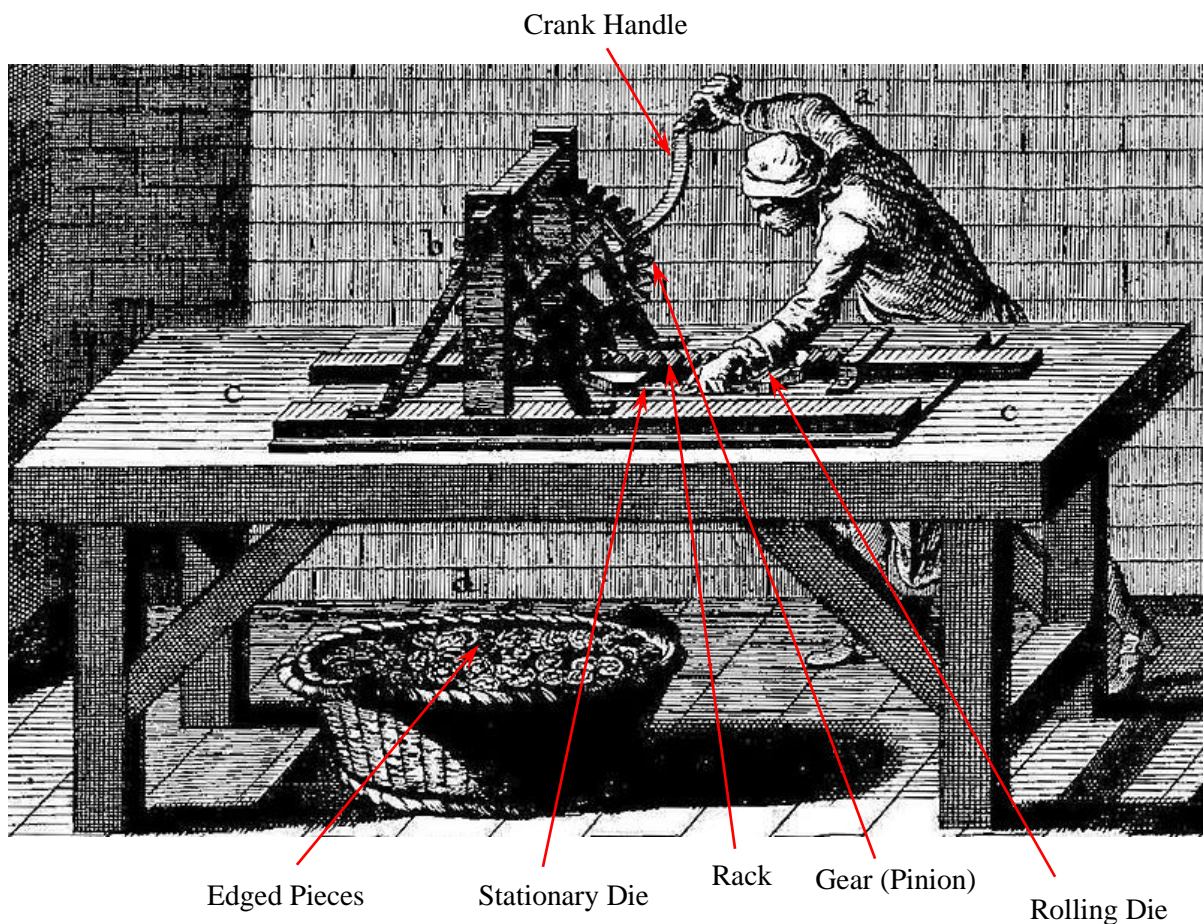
Castaing machine for applying edges to coins.⁽⁷⁾
